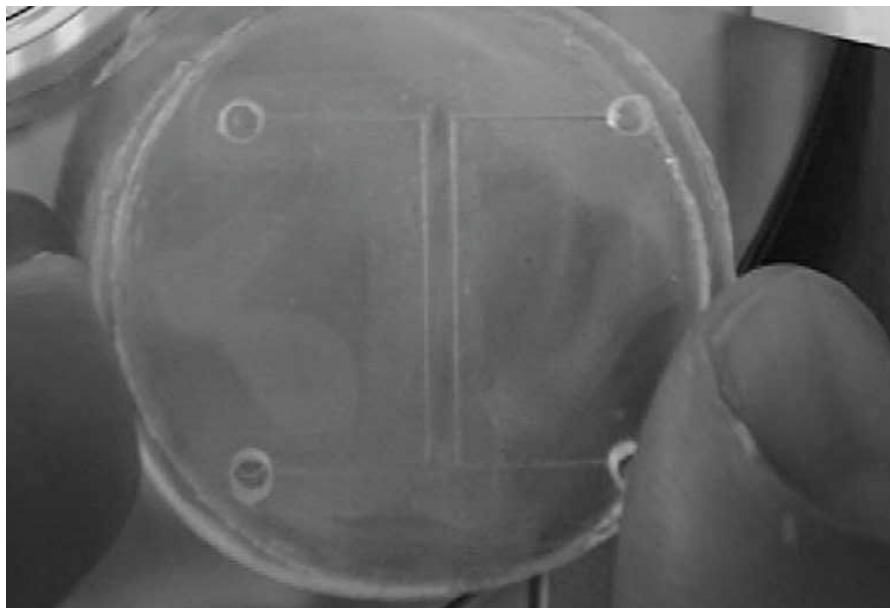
Image of a completed micro flow device. Two opposing injection molded parts has been aligned and assembled. These chips has been used for interferometric sensing performed on flow systems completely fabricated in Topas 8007 copolymer.
